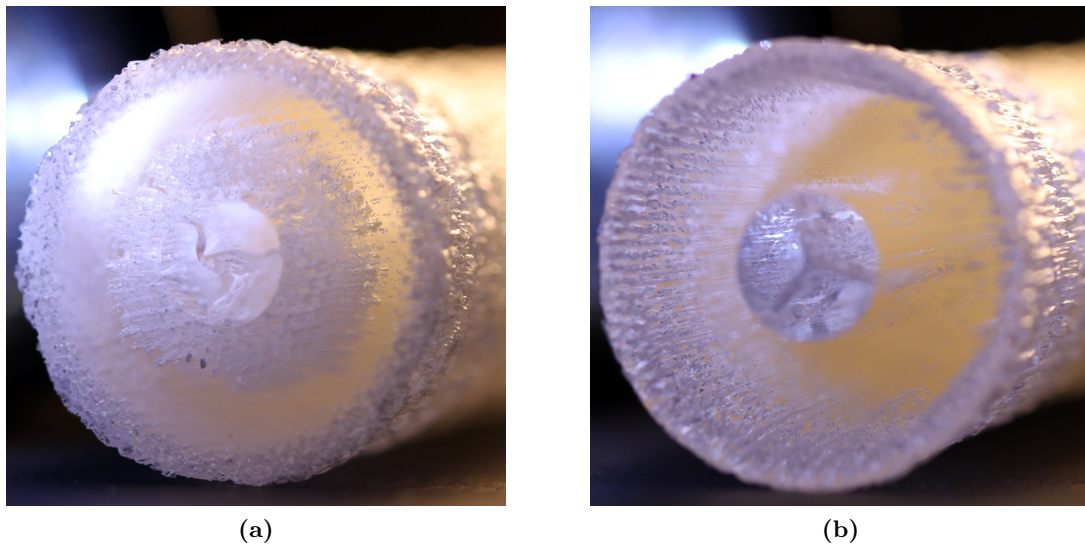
Cross sections of thick wall extrusion showing areas (a) with gas plume close to core area and (b) without gas plume.
